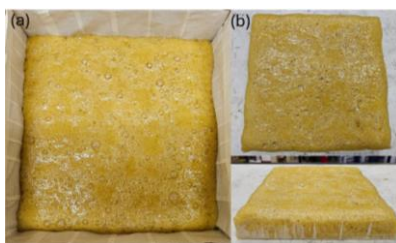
(a) Castor oil foam mixture poured into the mould for shaping and (b) foam core after demoulding.
